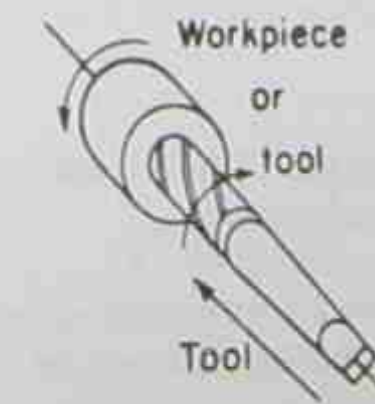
The essentials of drilling, showing tool and workpiece motions.
